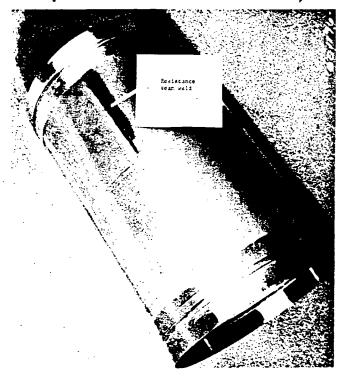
Resistance Welded Inner Line Liner, 38 cm (15 in.) Incomel 718
